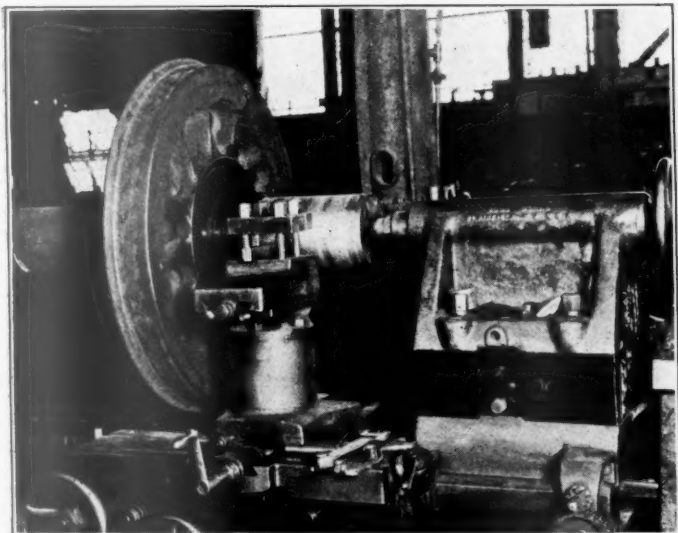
Journal Lathe Arranged to Turn Trailer Journals Without Removing the Wheels
